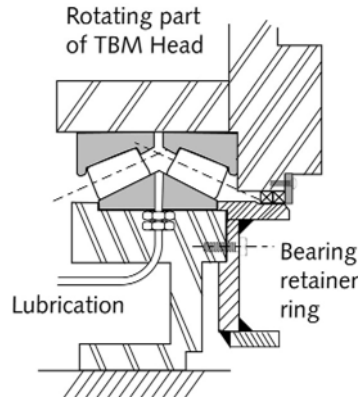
Original design of bearing mounting. This partial view shows the relatively flexible retainer ring
